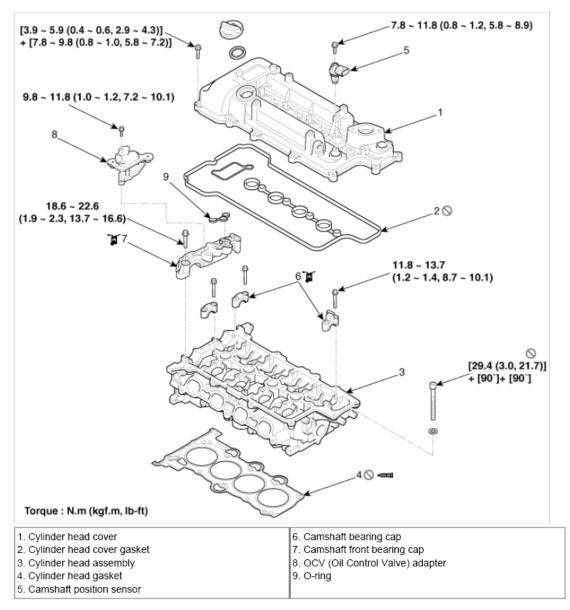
Identifying Cylinder Head Components With Torque Specifications (1 Of 2) Courtesy of HYUNDAI MOTOR AMERICA
